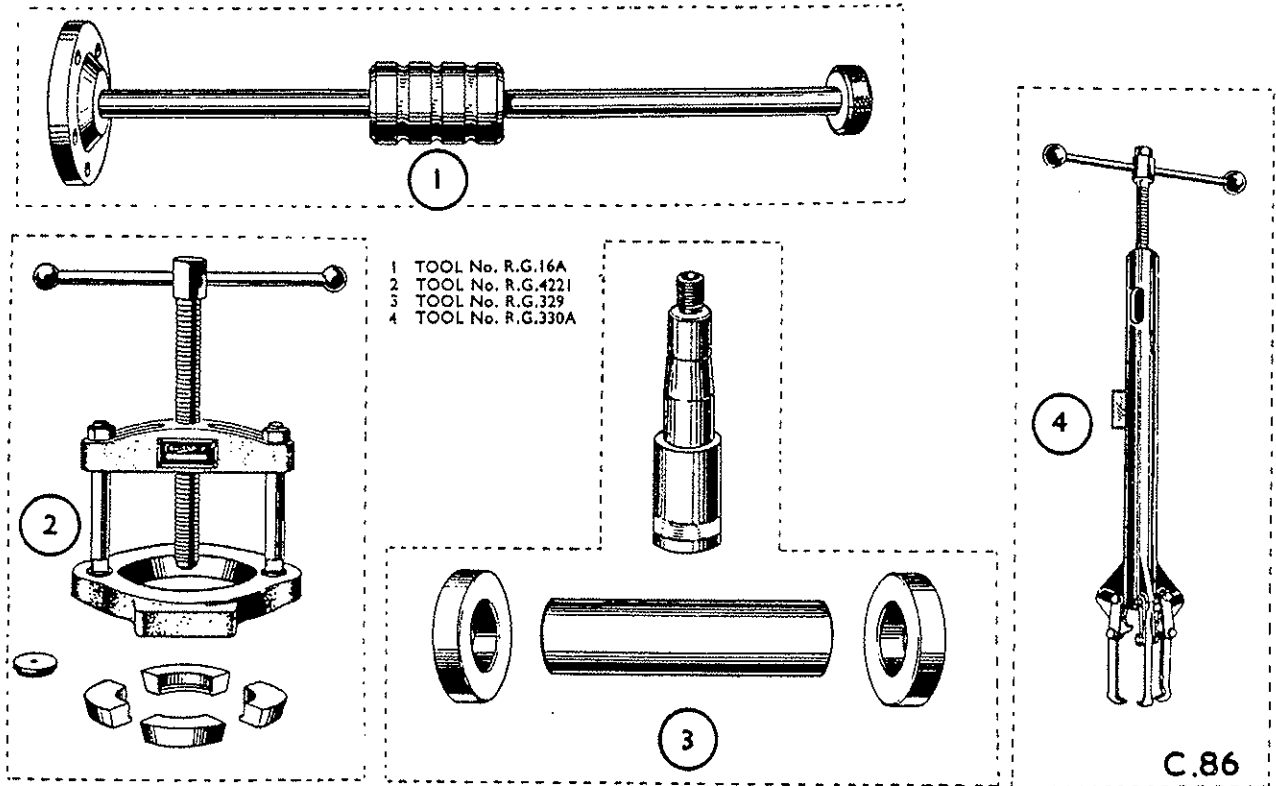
Churchill tools for hypoid rear axle overhaul
